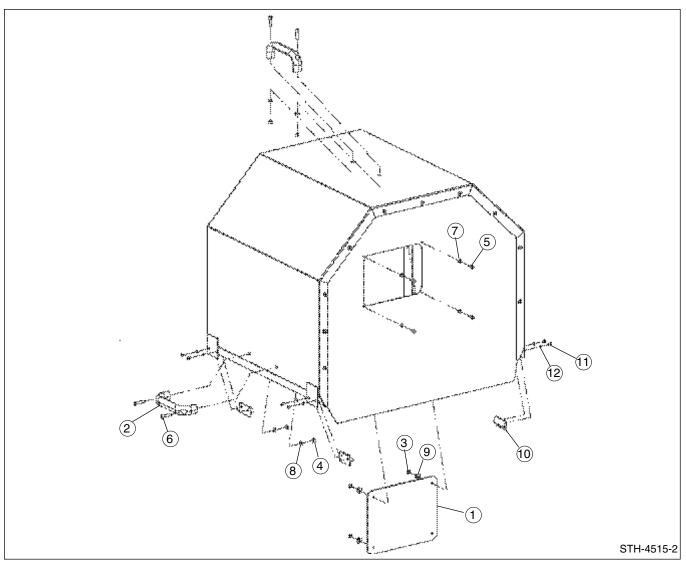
FIGURE L - REMOVABLE SPLASH GUARD ASSEMBLY, REAR (2 of 2)
